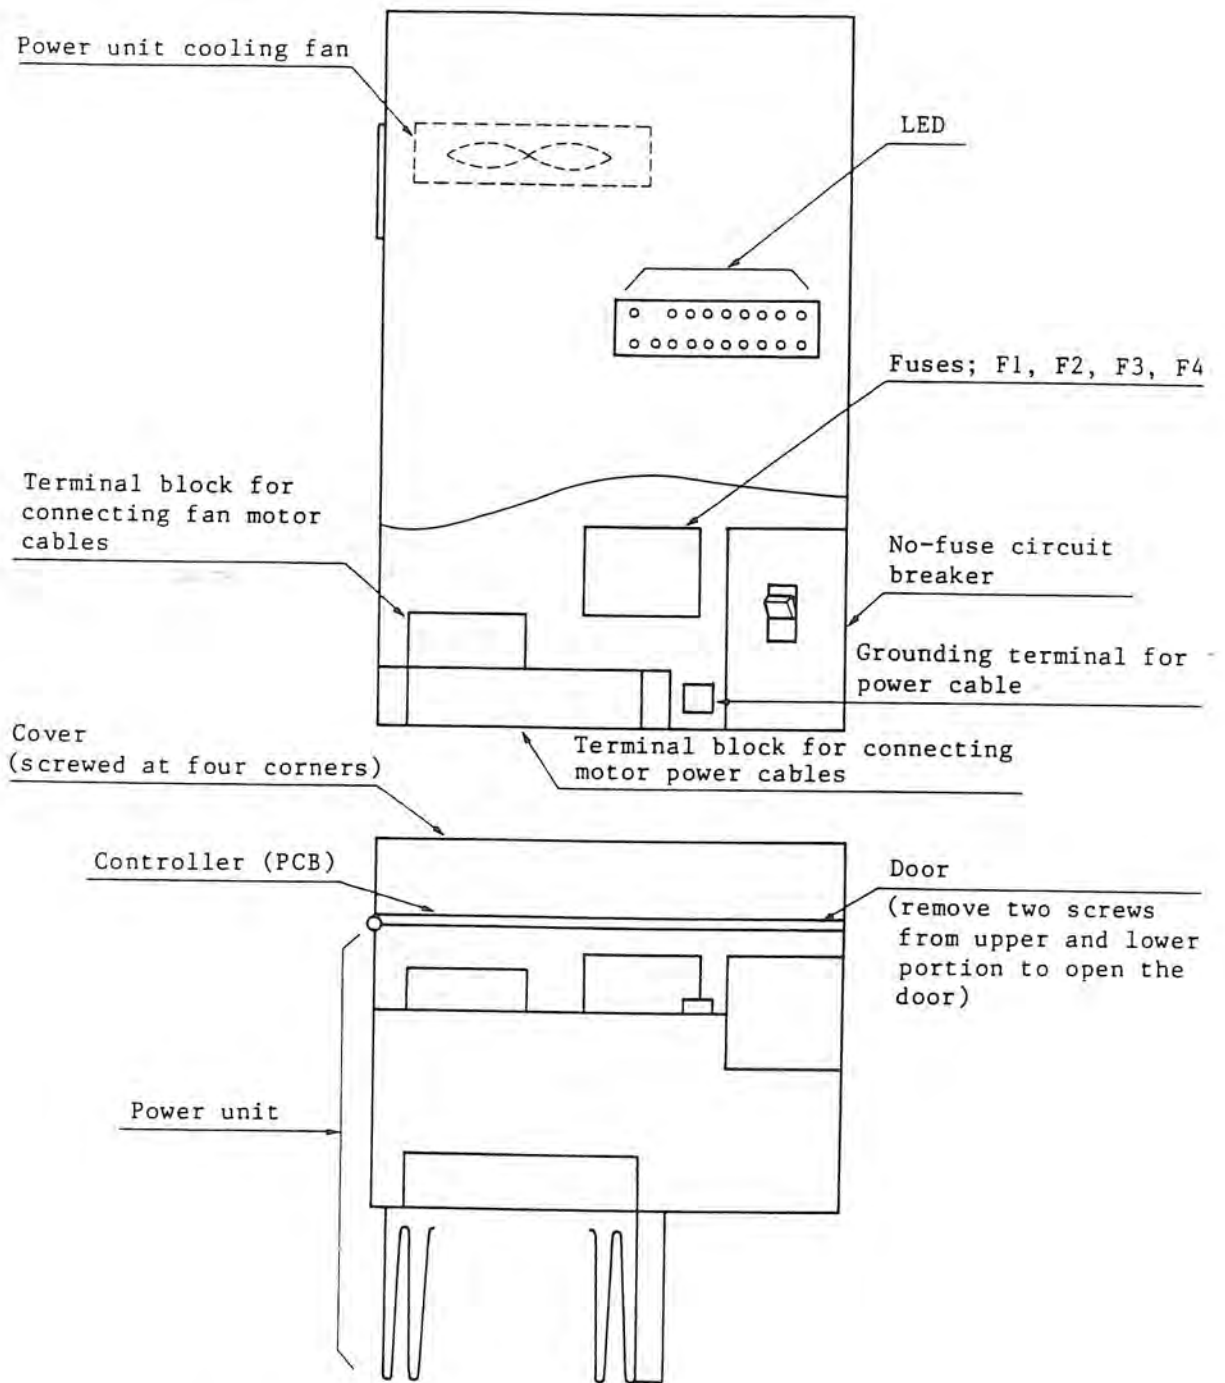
Arrangement of Major Component Parts of D3/D6
